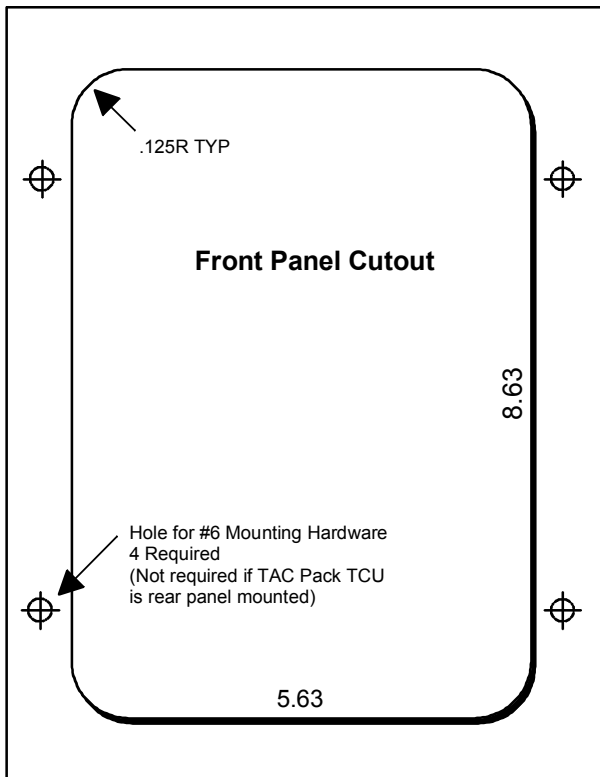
, "Control panel installation with TCU mounted to dead front"
